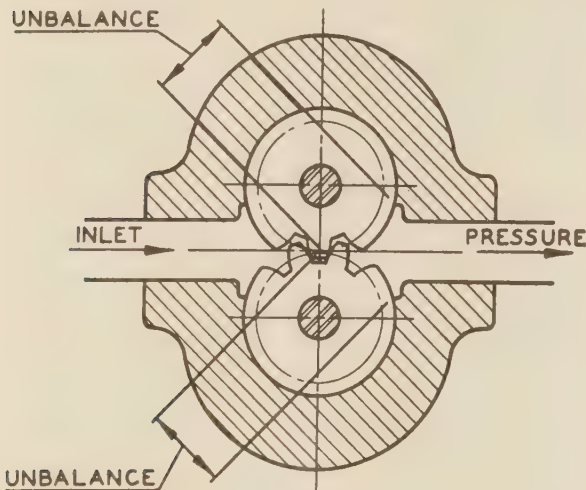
UNBALANCED GEAR-PUMP DESIGN
